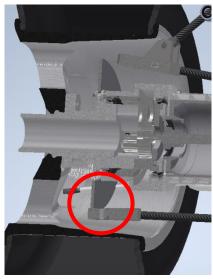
Half section of the front wheel in early development highlighting the clash between the lower wishbone joint and break disk
